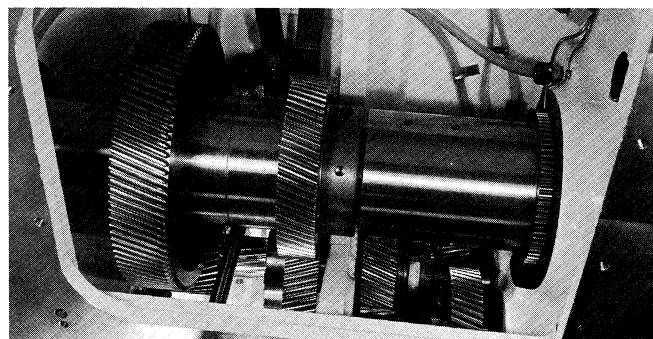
Closeup view of transmission gearing in boring machine spindle head.
